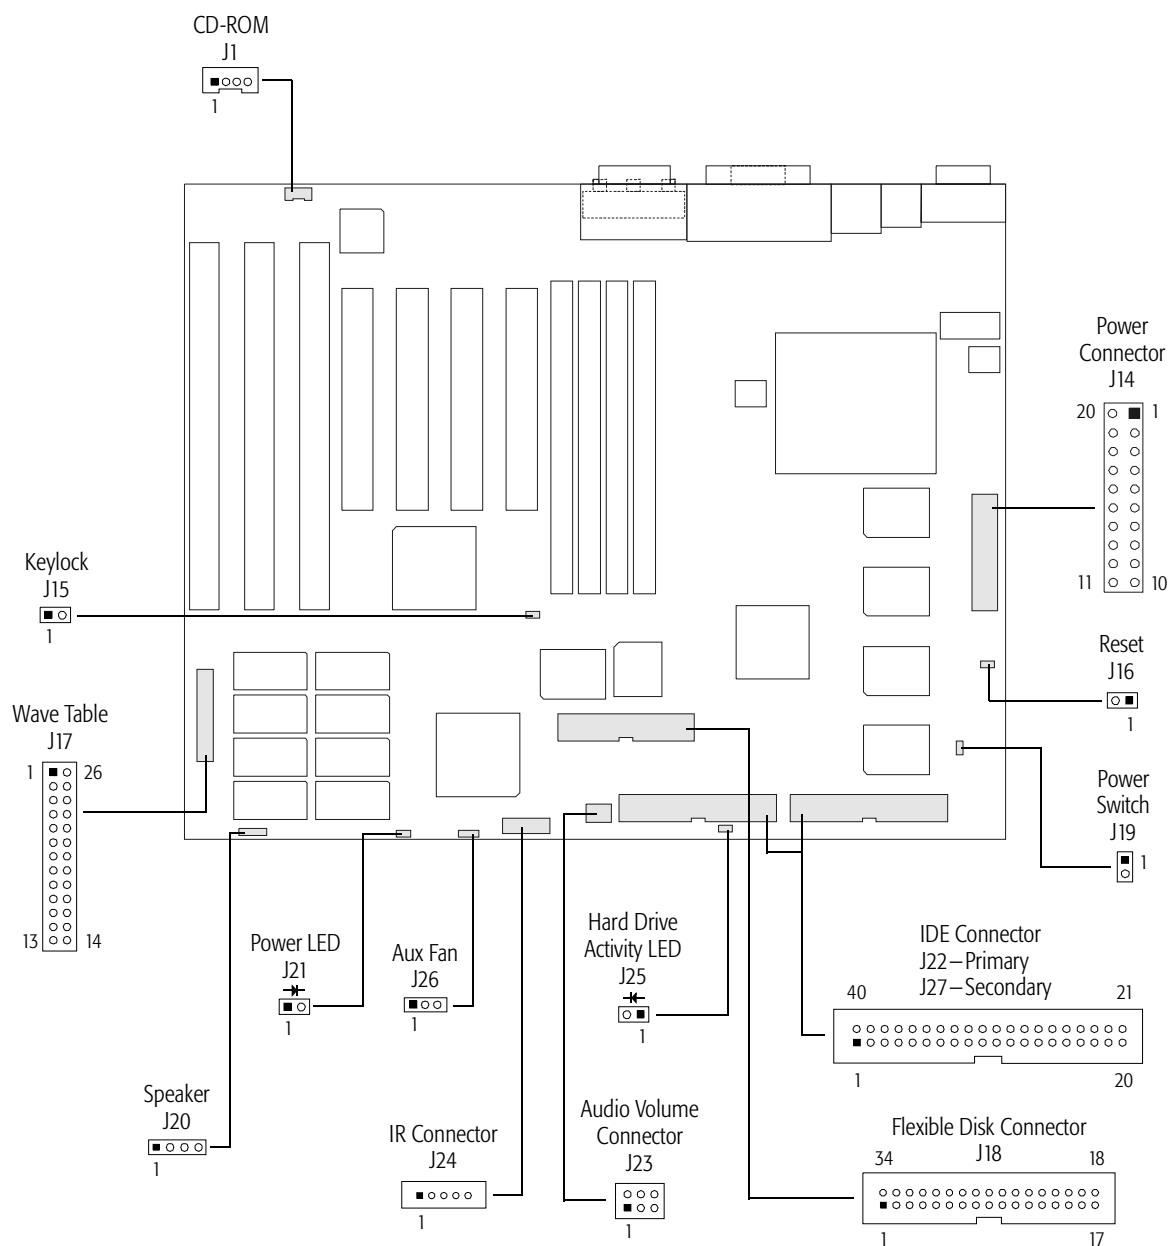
AMD Smoky Mountain Motherboard Component Locations
